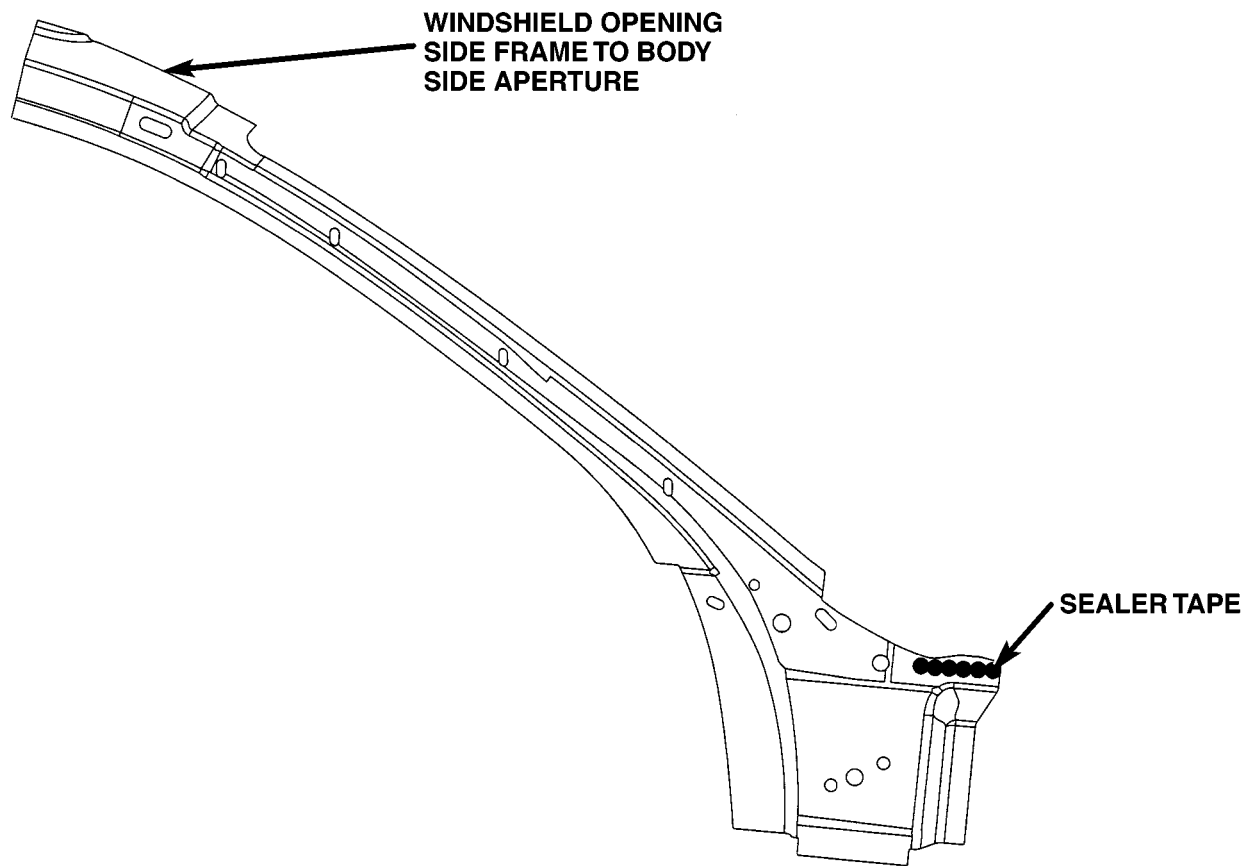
WINDSHIELD OPENING SIDE FRAME & BODY SIDE APERTURE
